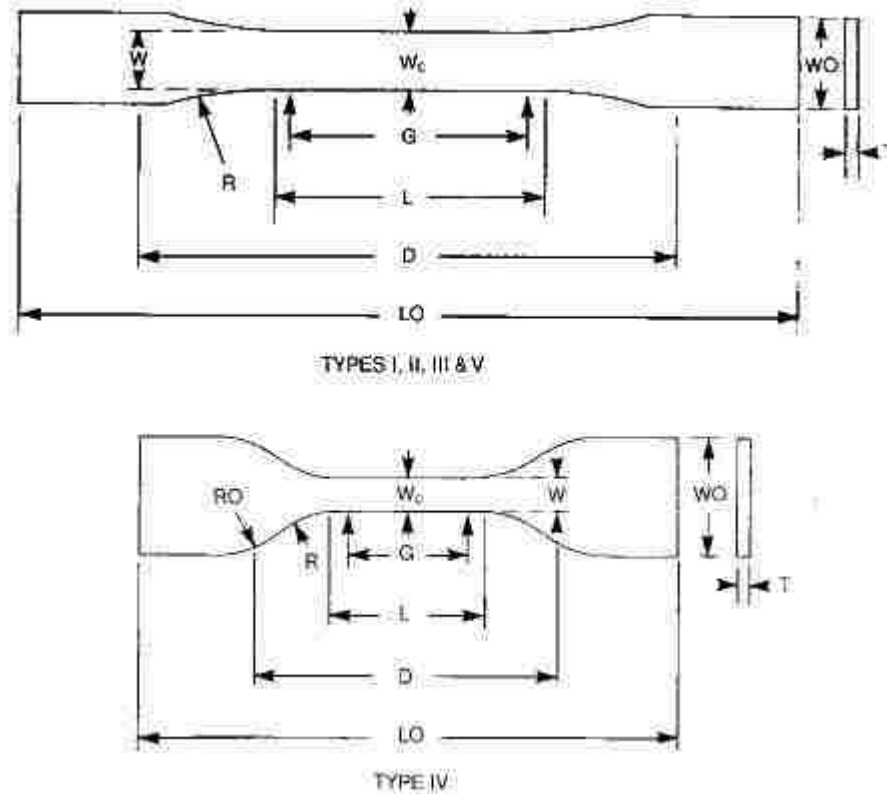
ASTM specimen dimensions (D 638) [16]
